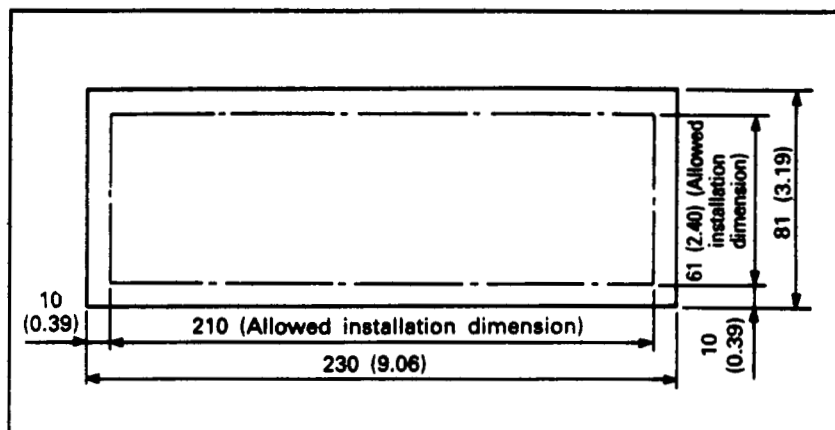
Allowed Installation Dimensions for Cable-Through Fittings
